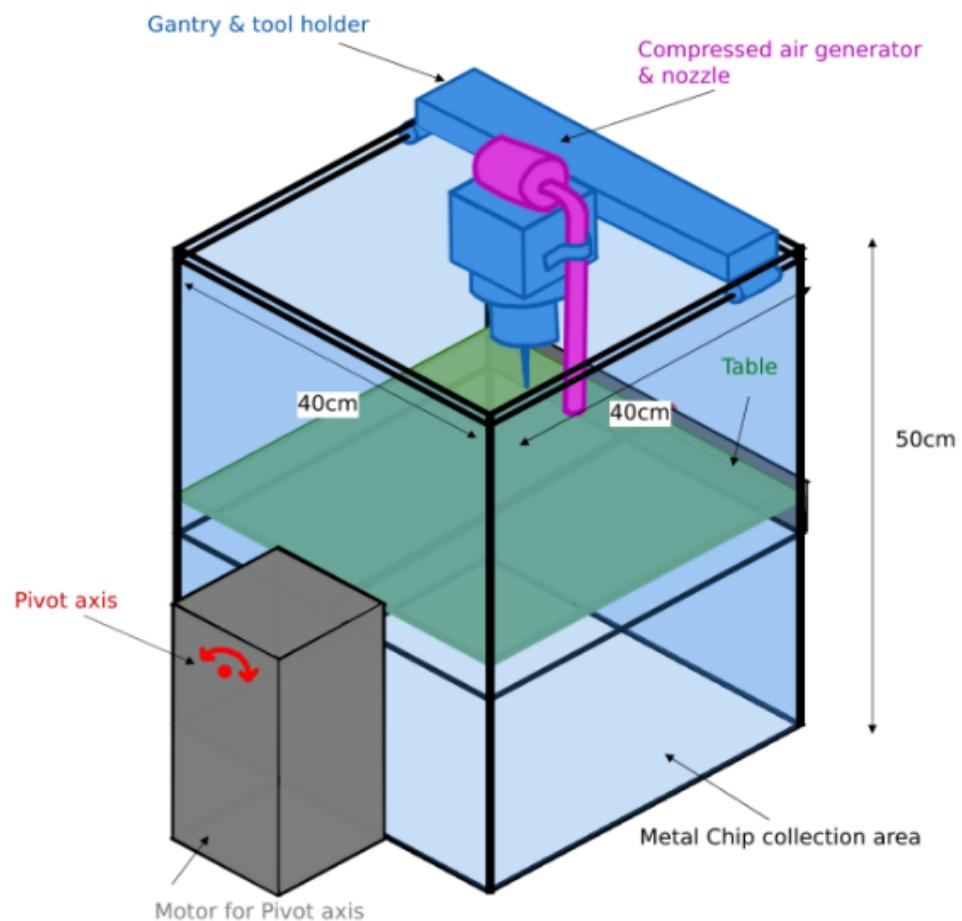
Isometric view of The Gantry Tipper, with some rough dimensions.
